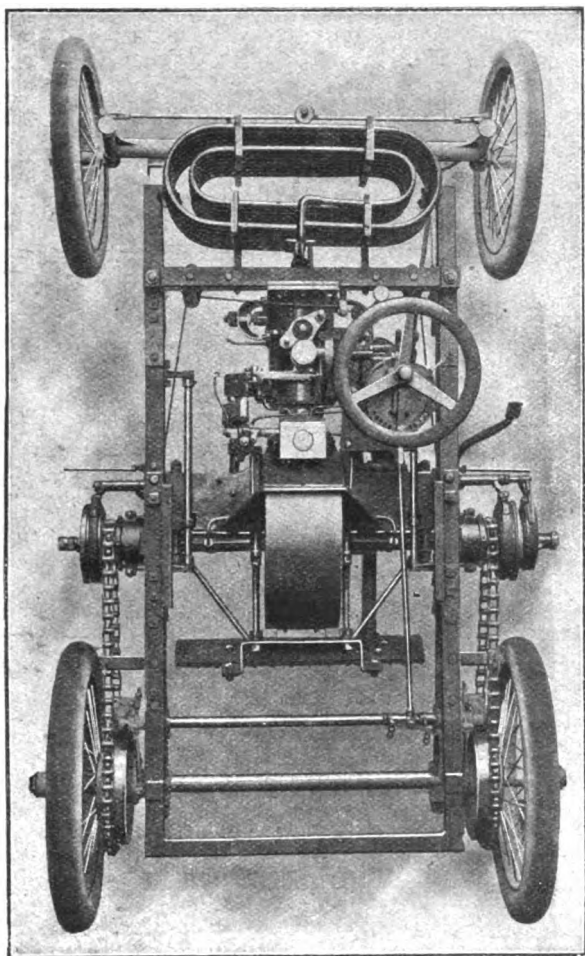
PLAN OF "MOTORMOBILE" CAR.
